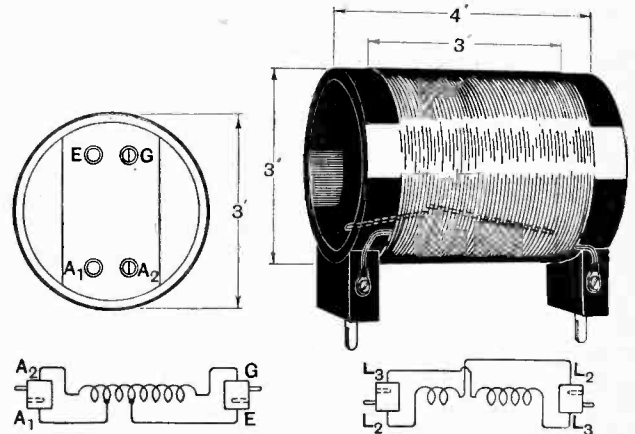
Dimensions and connections of the tuning coils and H.F. transformers.
